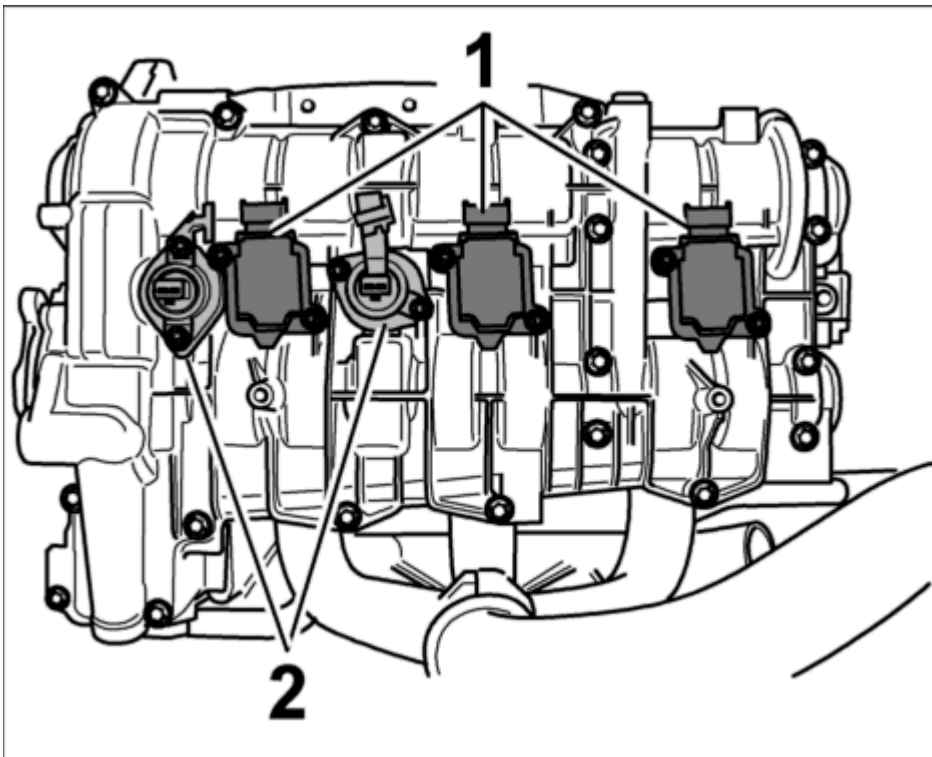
Hydraulic valves for camshaft adjustment and ignition coils
